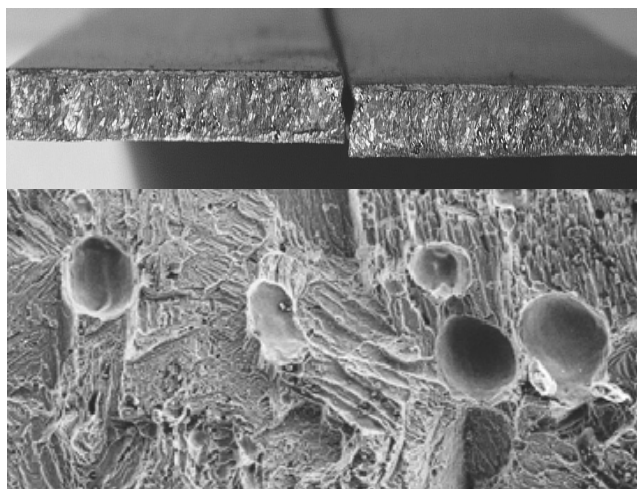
Fracture surface (brittle fracture, porosity) of the titanium alloy Ti6Al4V butt joint no. W3 after bend test (Table 6)
